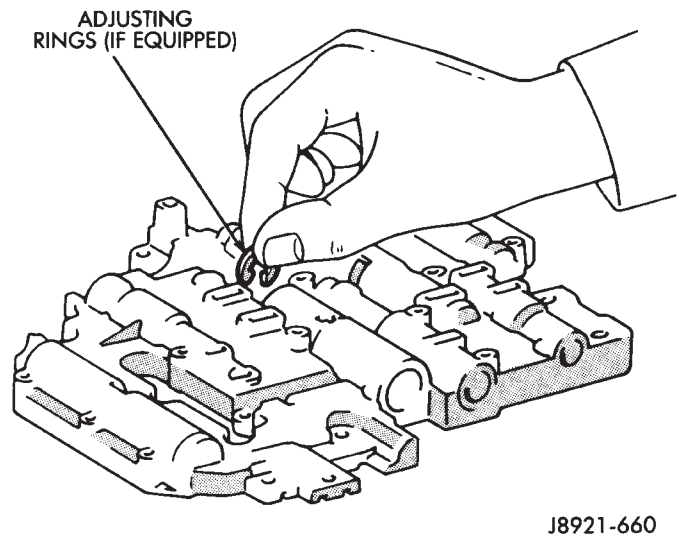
Install Throttle Valve Adjusting Rings (If Equipped)
